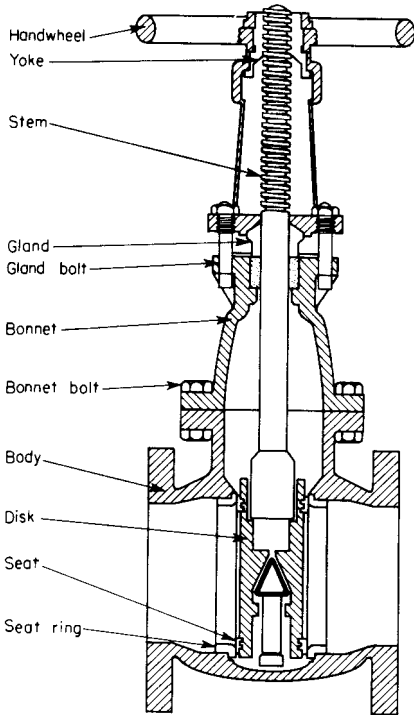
Double-disc rising-stem flanged-end gate valve for 150-psig service.
